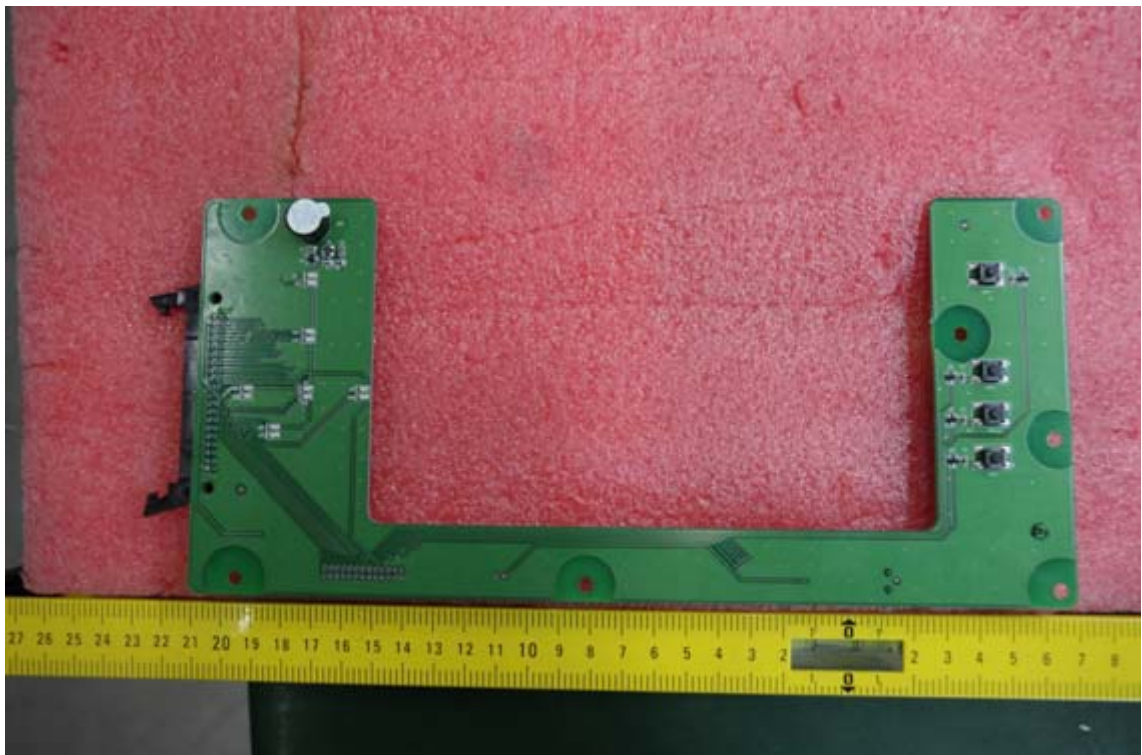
Board SNT\_PCB\_3320\_JP, traces side view
